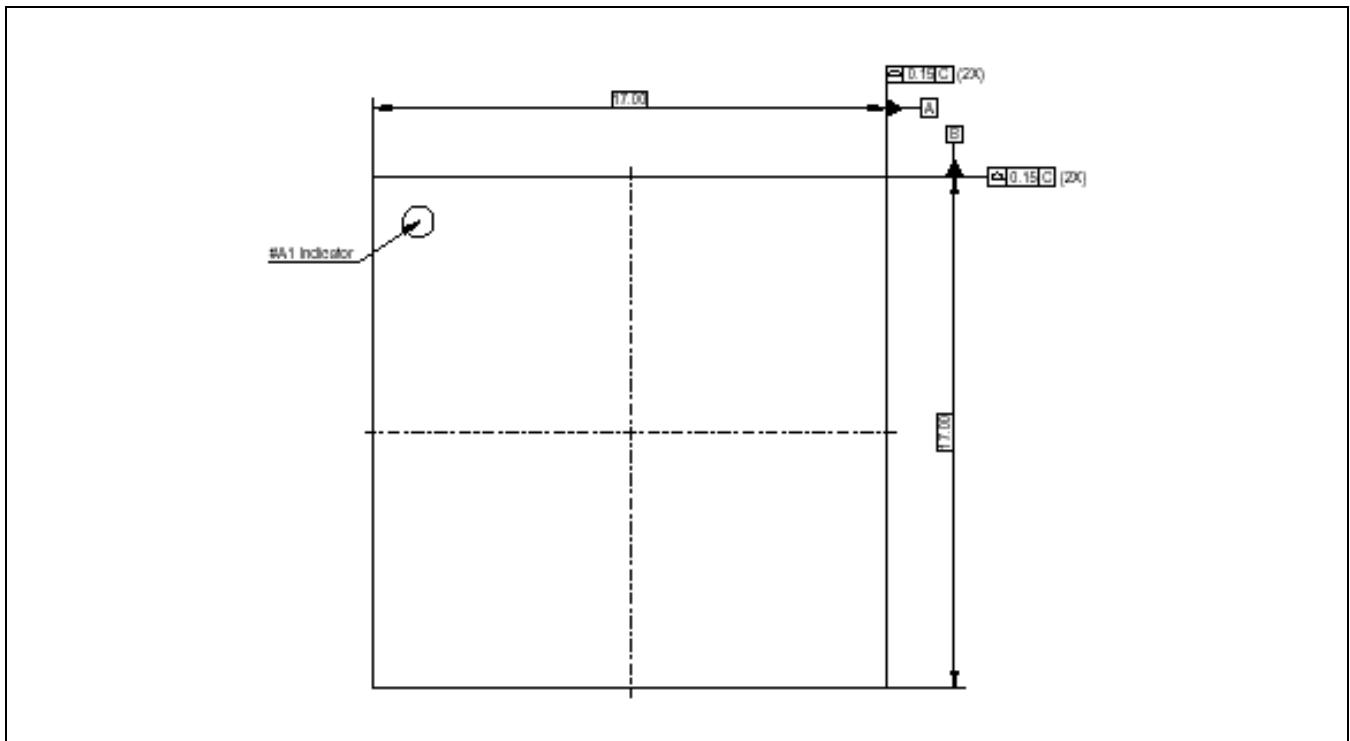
S5PV210 Package Dimension (584-FCFBGA) – Top View
